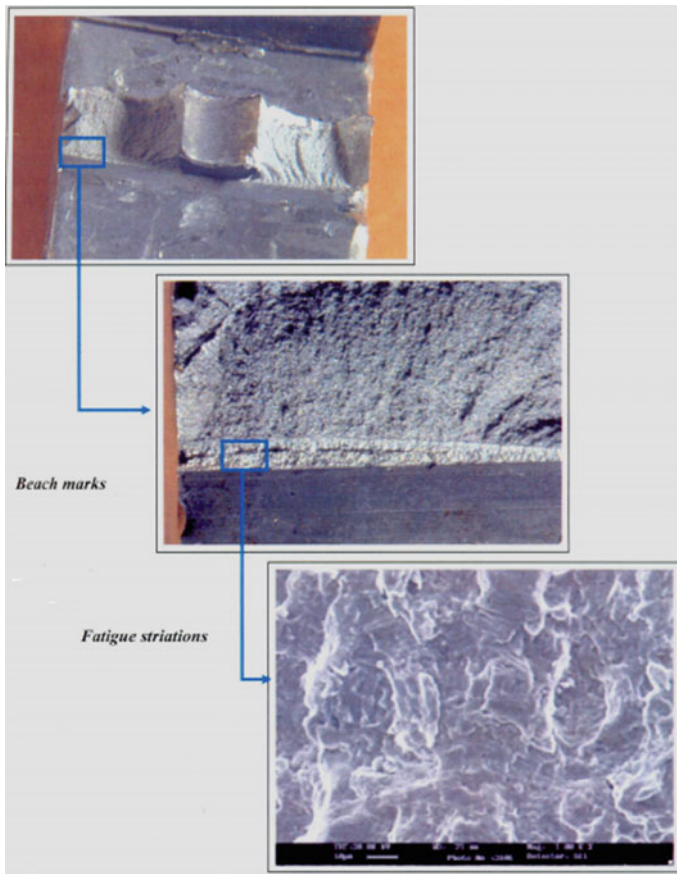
Presence of fatigue crack at fillet radius of blade lug
